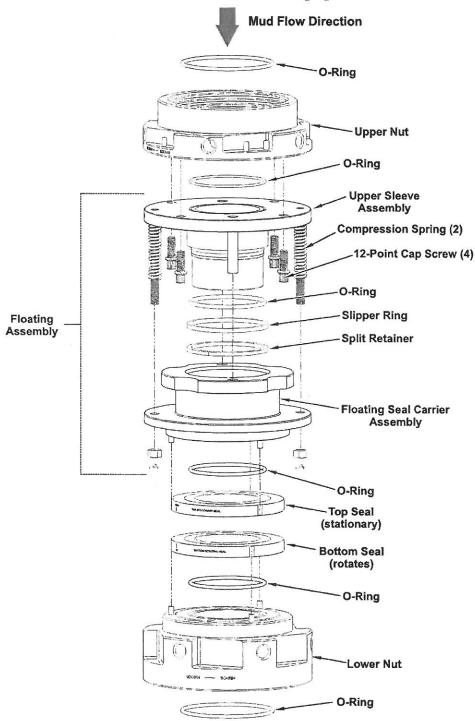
Standard Mechanical Washpipe Assembly (Exploded View)
